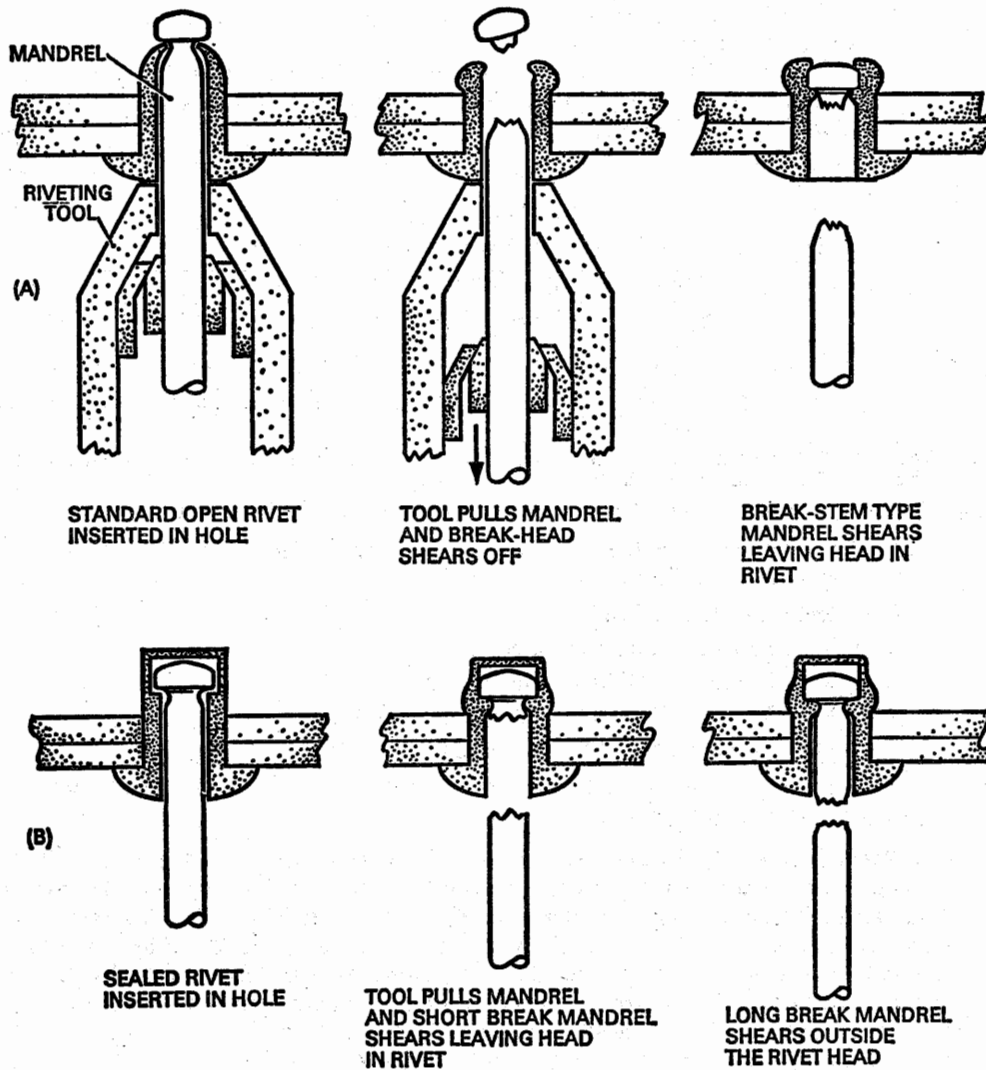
CLOSING TUCKER 'POP' RIVETS.
